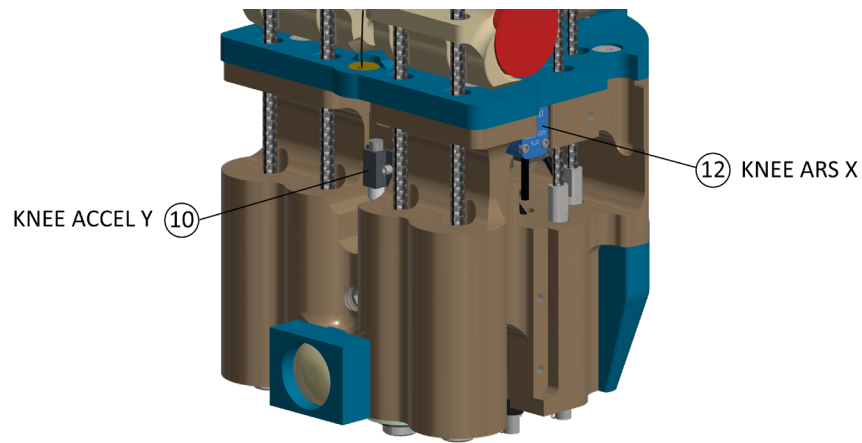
Accelerometer and ARS Knee Top Level Exploded View 5
